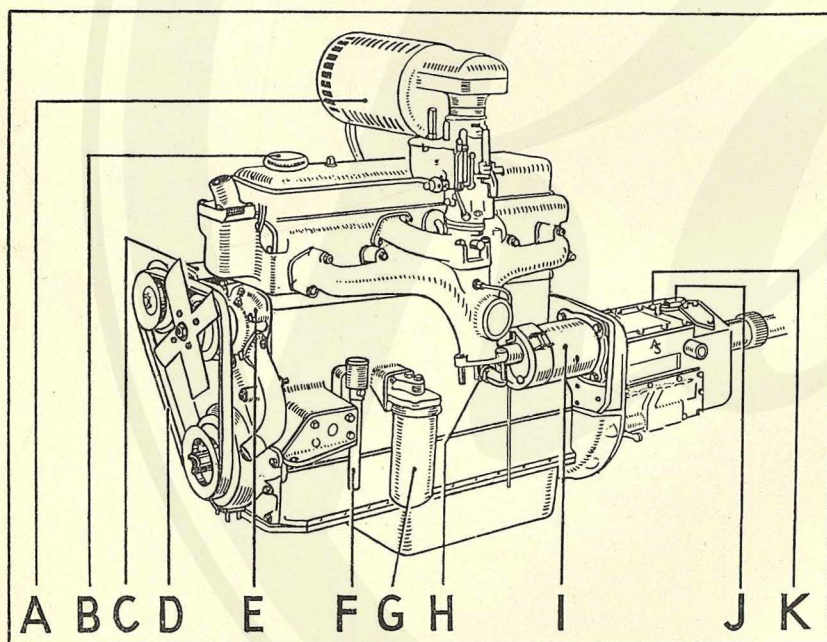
Nearside of engine. A, air cleaner and silencer; B, engine oil filler plug; C, dynamo; D, belt; E, water pump; F, breather and tappet oil filter; G, oil filter; H, oil pressure relief valve; I, starter motor; J, gear box filler plug; K, gearbox dipstick.
